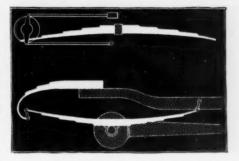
The cantilever type of rear spring illustrated at the top. The right end is attached to the frame and the left end to the rear axle housing. The three-quarter elliptic rear spring is shown at the bottom
